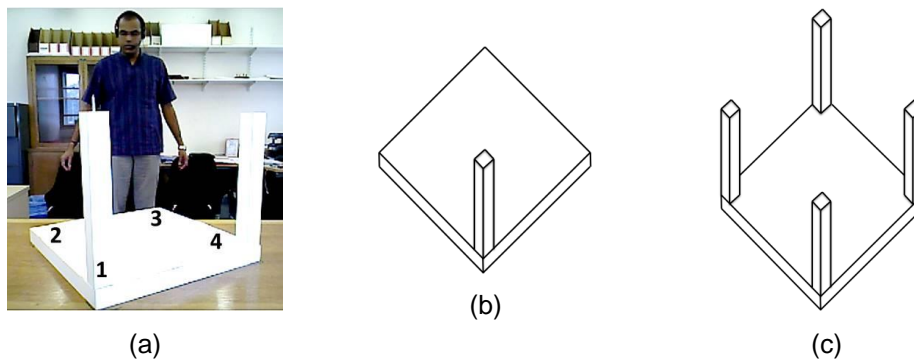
(a) Wrong workpiece configuration (b) Chosen workpiece configuration (c) Overall task goal
